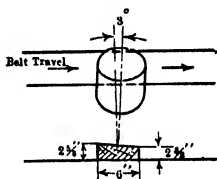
Guiding a Belt by Tilting the Idler Stands and Pulleys.
